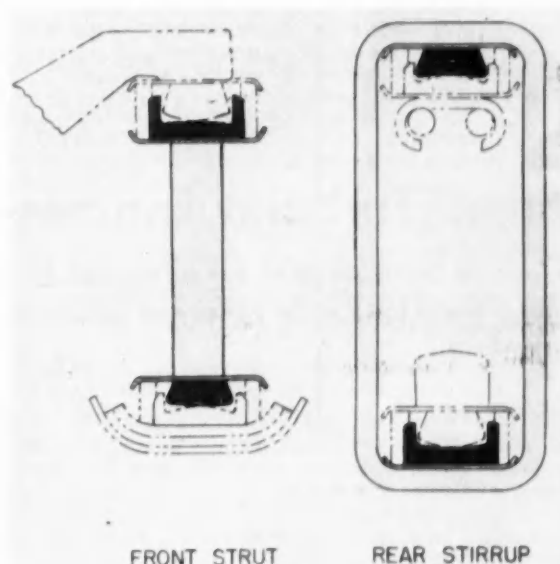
Front struts and rear stirrups had to operate with minimum friction. The design finally developed (above) used bearings with a slight curvature which reduces the spread of the contacts and reduces friction.
